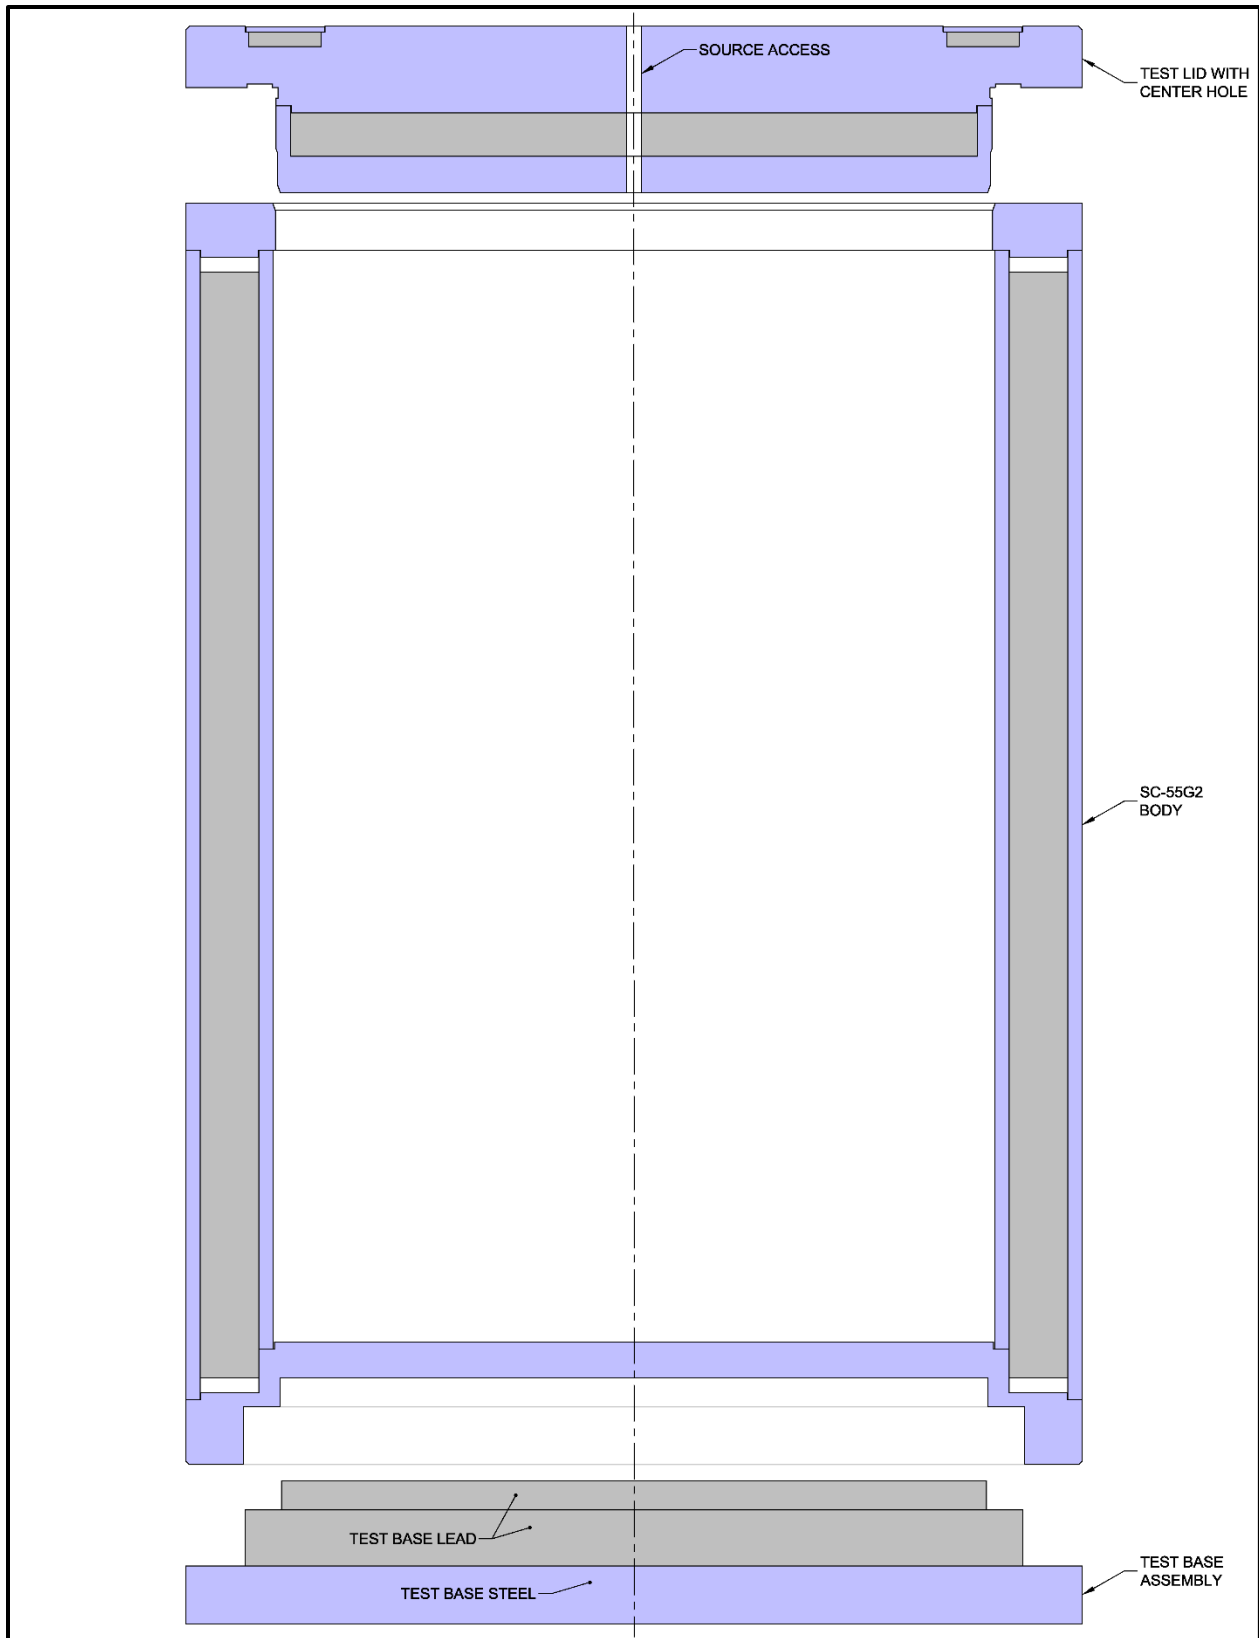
SC-55G2 Gamma Scan Test Assembly Exploded View
